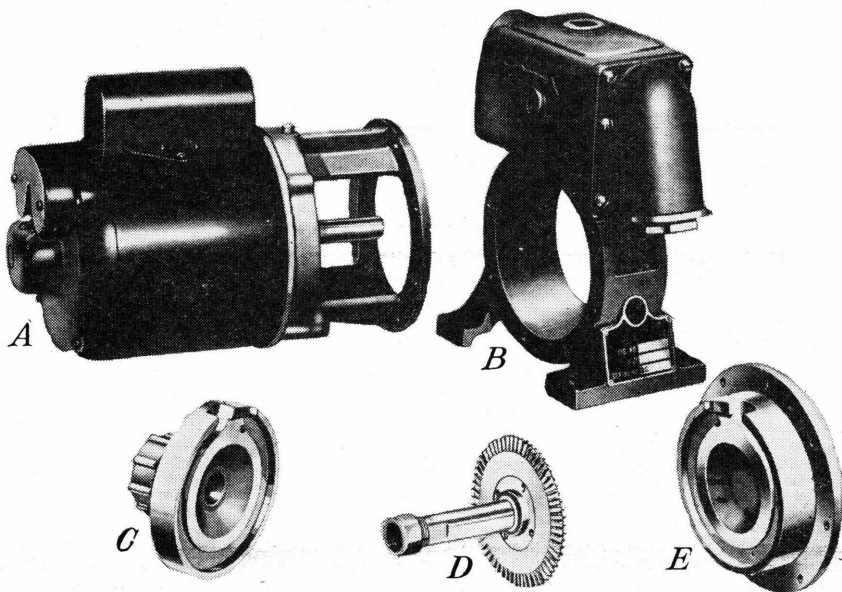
Turbine pump: A, Electric-motor assembly; B, pump frame; C, end bearing and ring liner; D, runner with slots cut into rim of disk; E, outboard end and ring liner.
